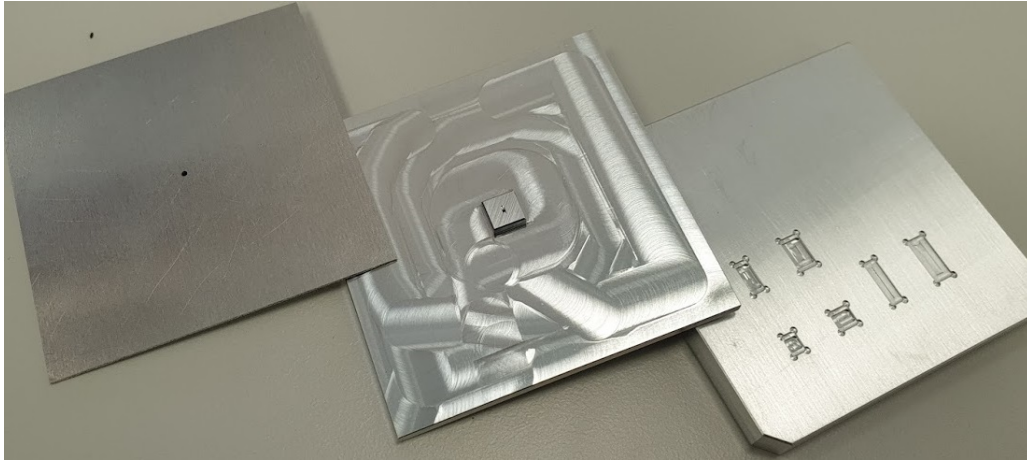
Adapter parts used on the FC150, from left to right, the chuck adapter, the arm's tool and the upper chip cassette.
